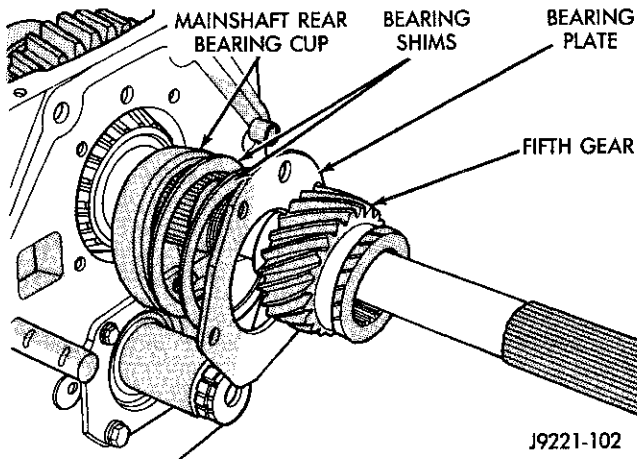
Removing Mainshaft Fifth Gear Bearing Plate, Bearing Shims, And Rear Bearing Cup
